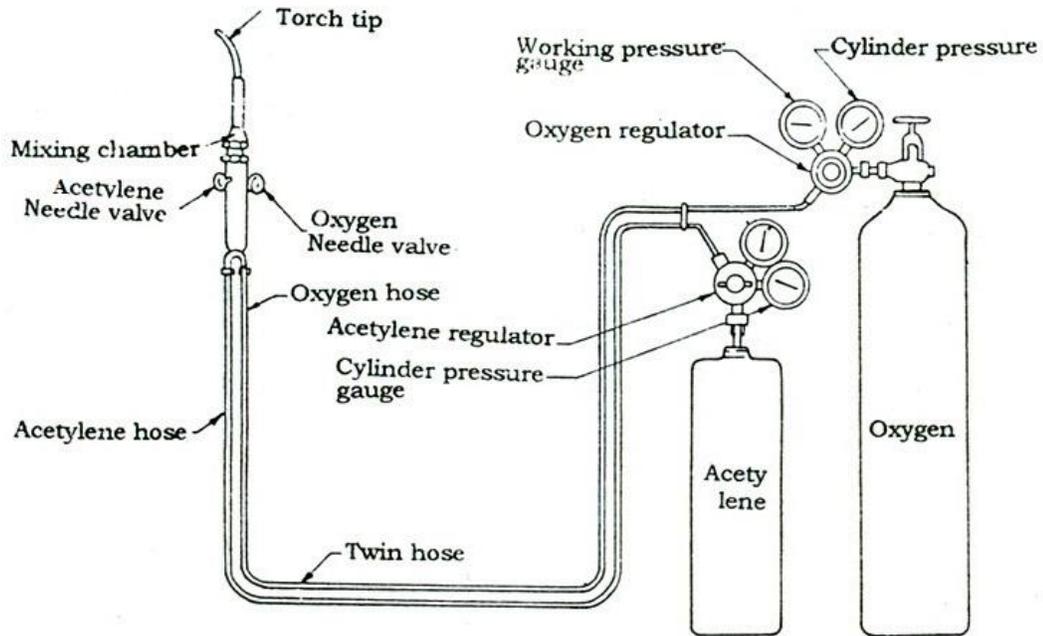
Oxyacetylene Welding Equipment Setup (Workshop Practice, 2012).
